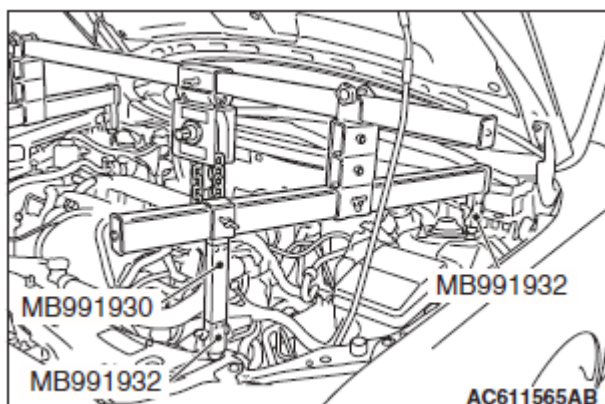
Holding Engine And Transaxle Assembly Using Special Tool
